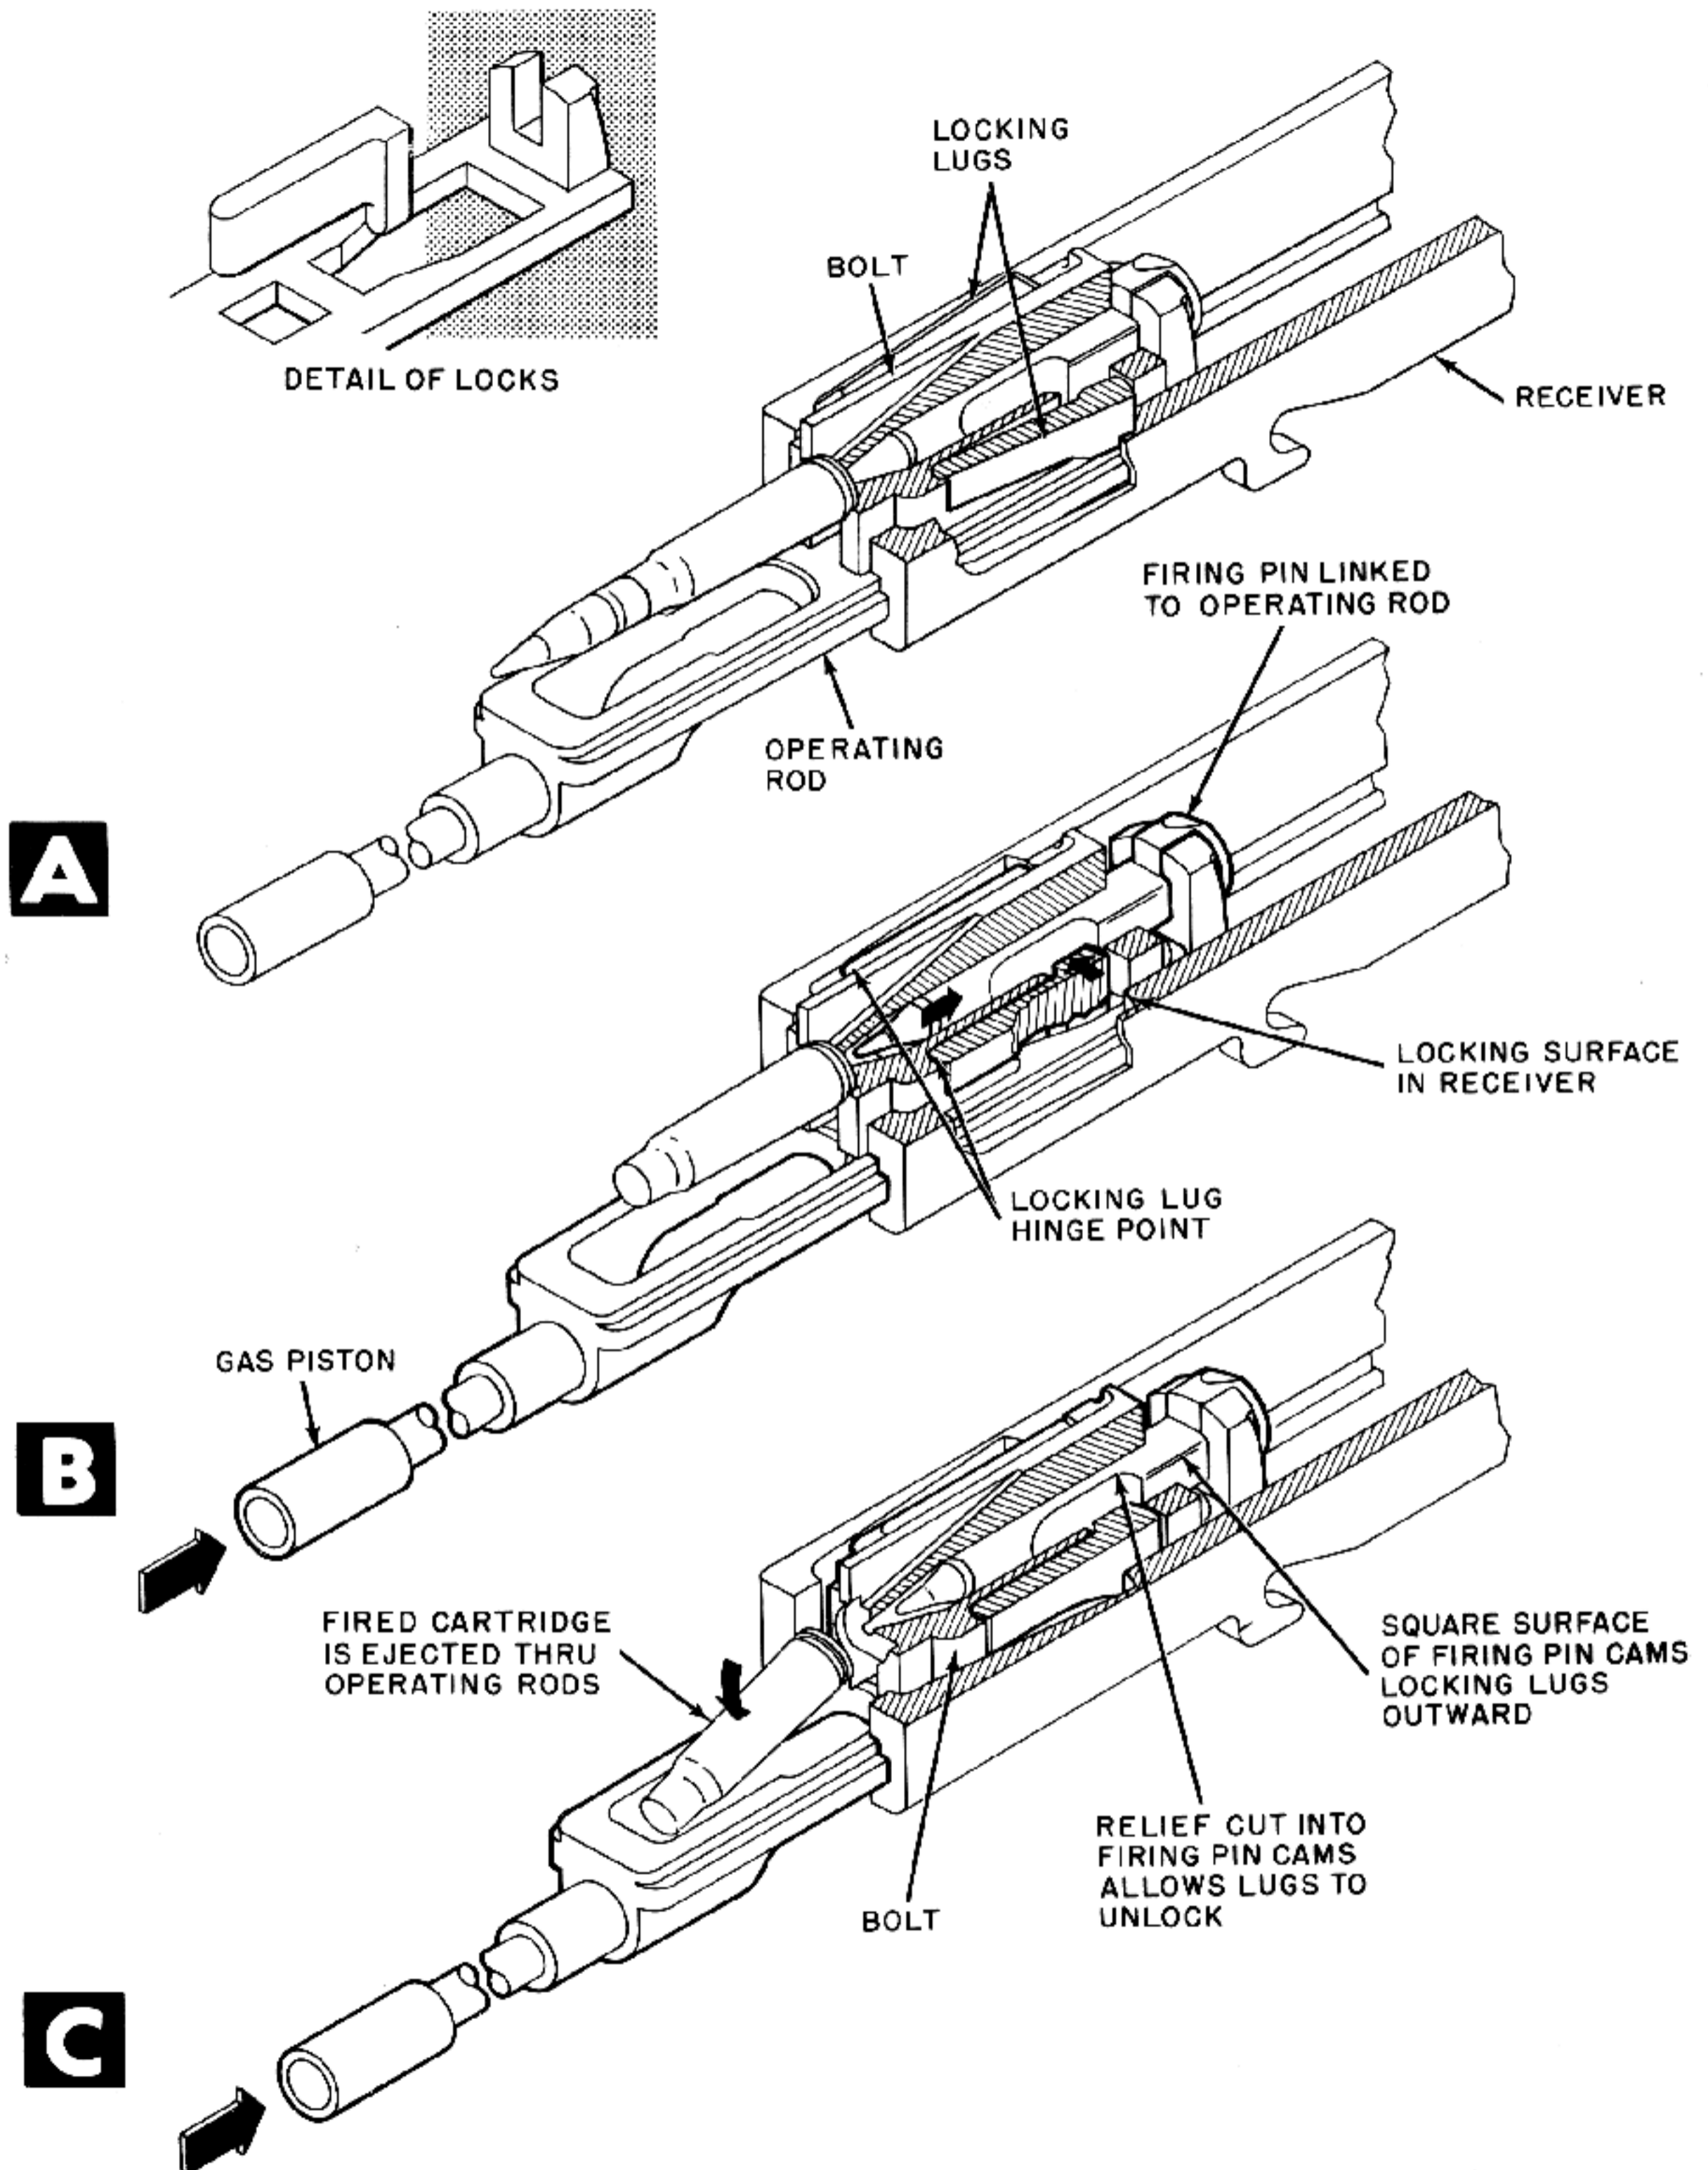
Cammed Surface on Operating Rod Unlocks Lugs From Receiver.
